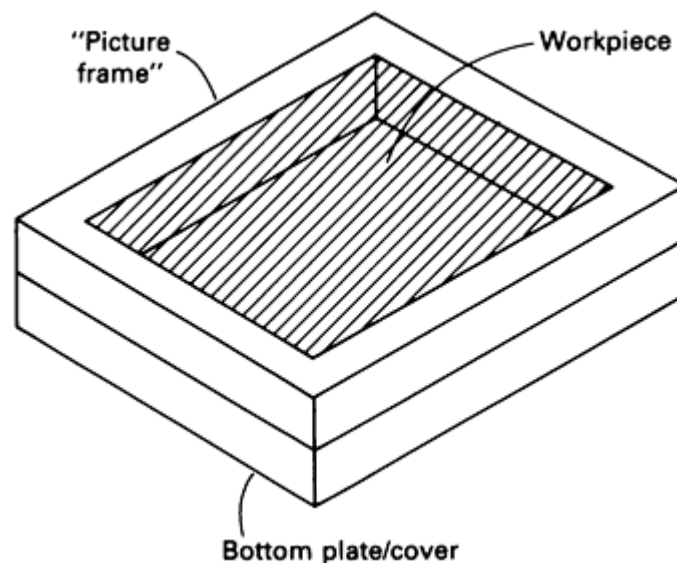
PACK USED FOR ROLL WELDING. THE TOP COVER, WHICH WOULD BE WELDED IN PLACE BEFORE ROLLING, IS NOT SHOWN.
